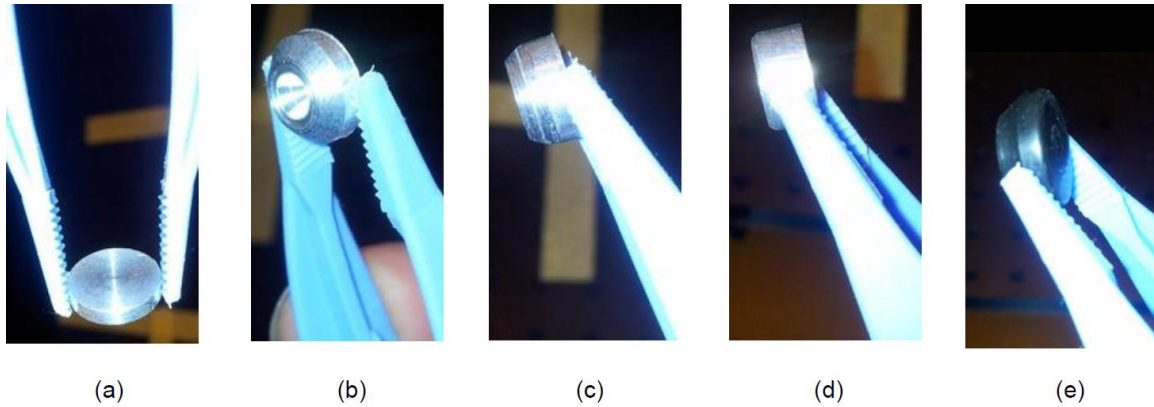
Photographs of (a)-(d) various Aluminum backing plate designs (a) Flat finish of the surface (b) Conical back end (c) partially conical – partially cylindrical back end (d) cylindrical back end and (e) Teflon, a more flexible material used as a backing plate. The back end maintains a conical shape, however the surface is now made convex so that it protrudes outwards and deforms under pressure.
